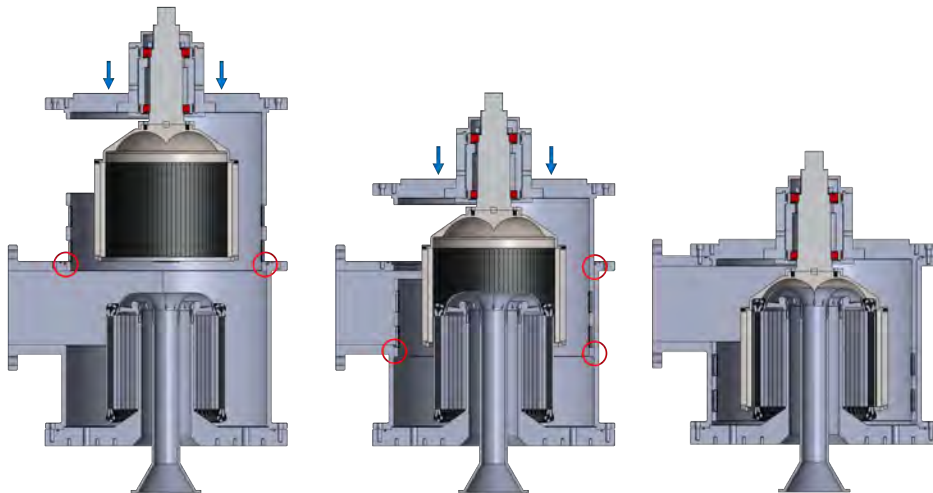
Rotor-stator assembly process (initial points of contact between cage and shielding circled in red)
